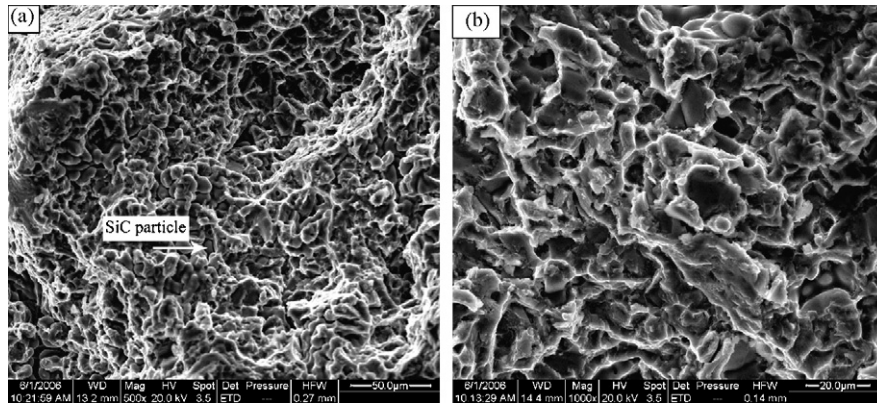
Scanning electron fracture micrographs of tensile specimen for welded joint with Al-Si filler.
